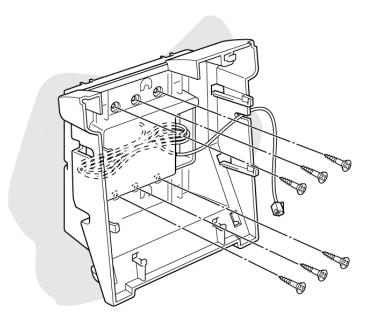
Attaching the Wall Mount Unit to the Wall
